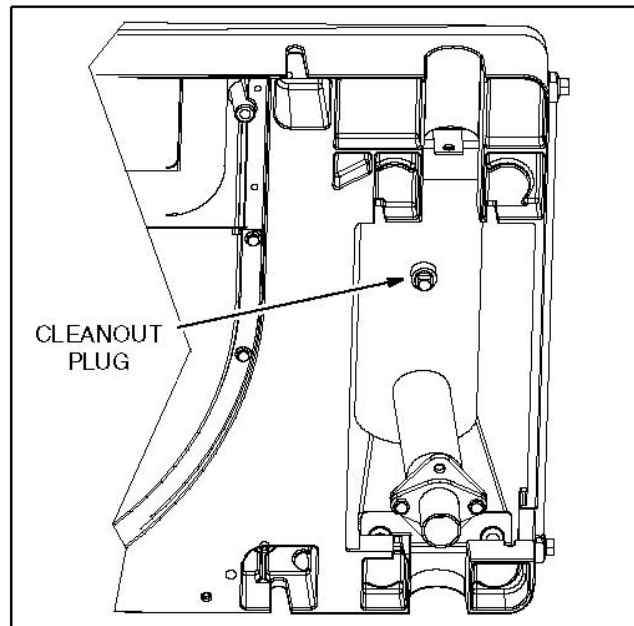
HJGAB AND HGJAE CLEANOUT PLUG (VIEW FROM BELOW)
